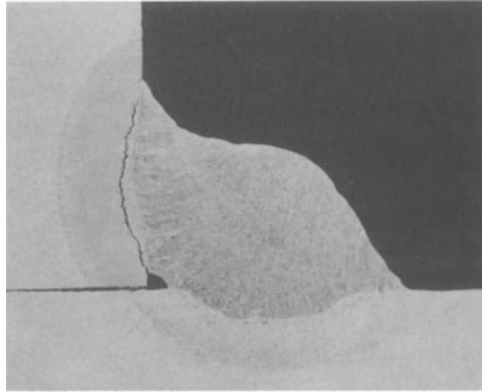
Cracking in the heat-affected zone of a fillet weld in high tensile steel. (Photo: Welding Institute)
